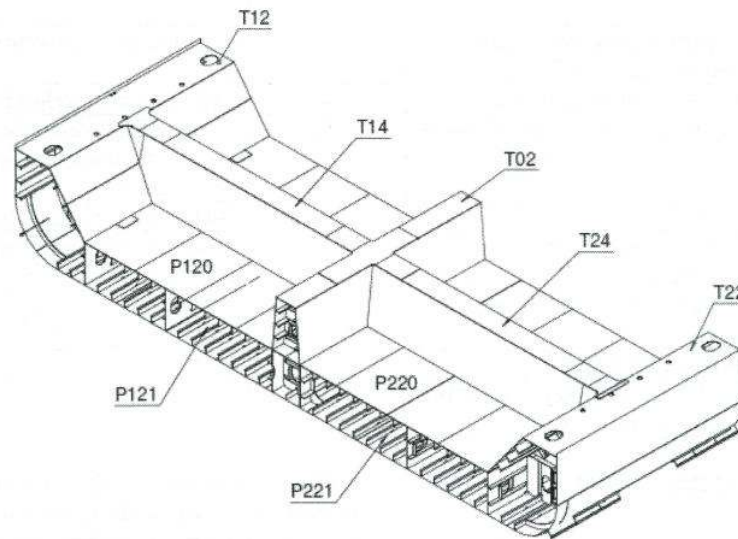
The final double bottom block (Very large three dimensional section) [9]
